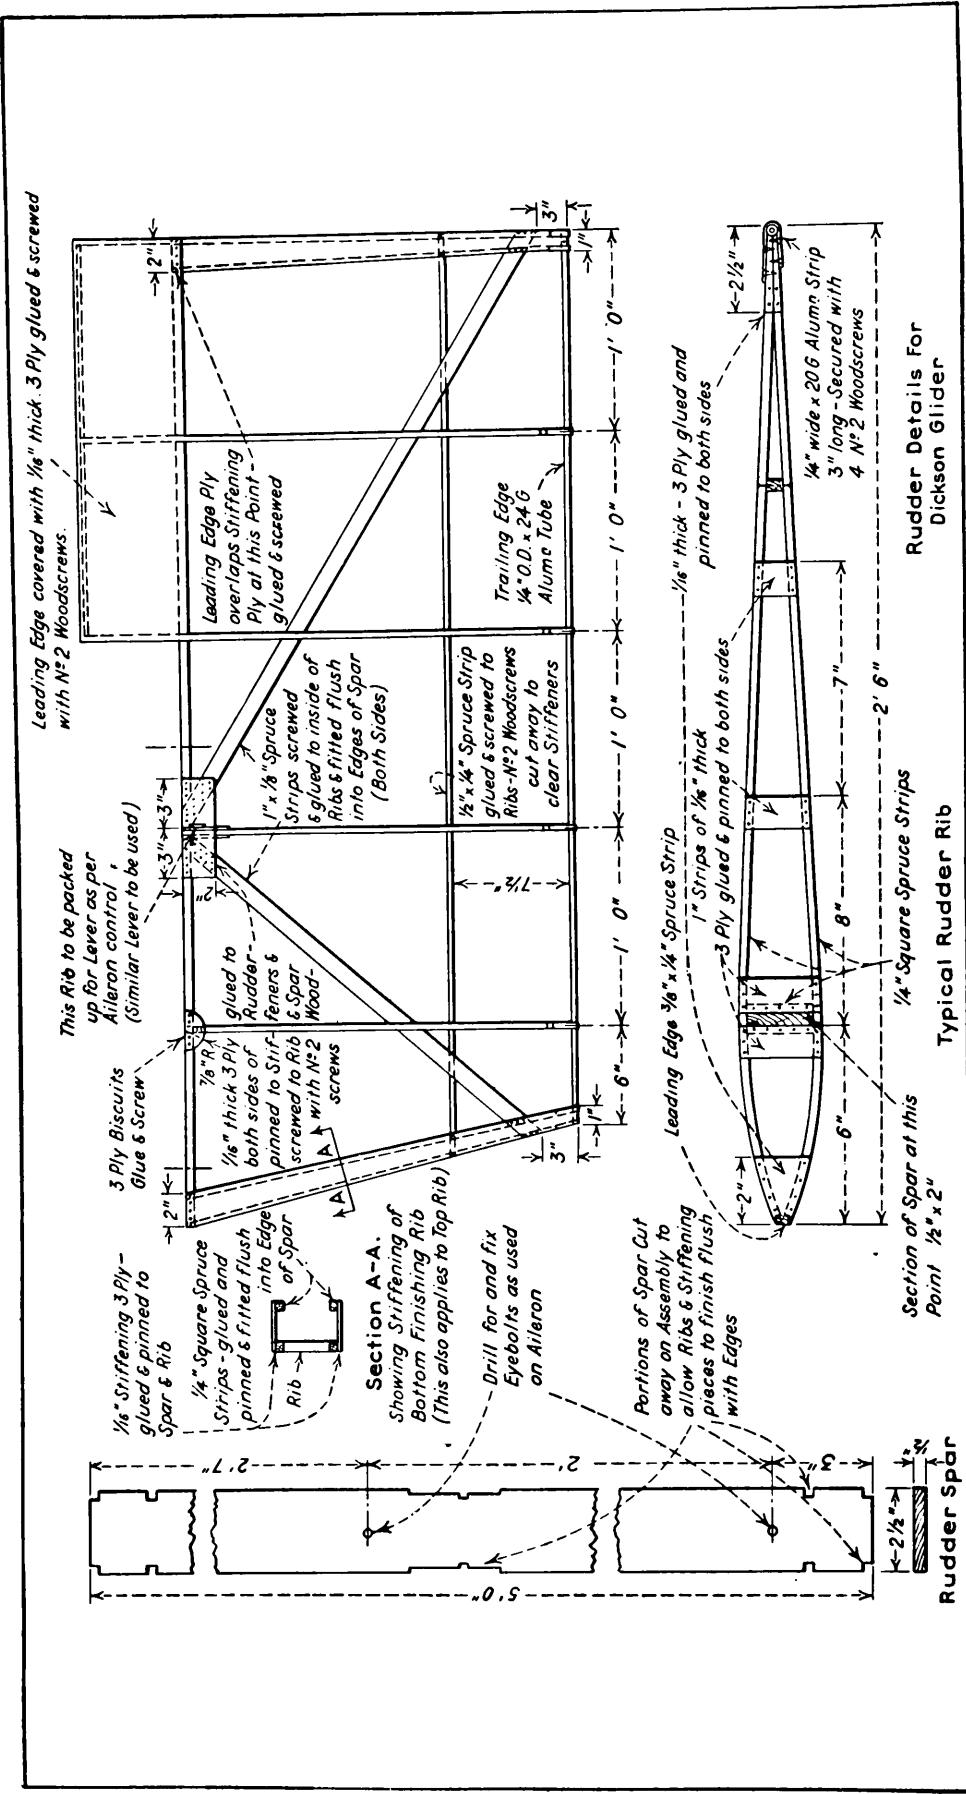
Detailed Drawings Showing the Rudder Frame Assembly Construction for the Dickson Training Glider,
